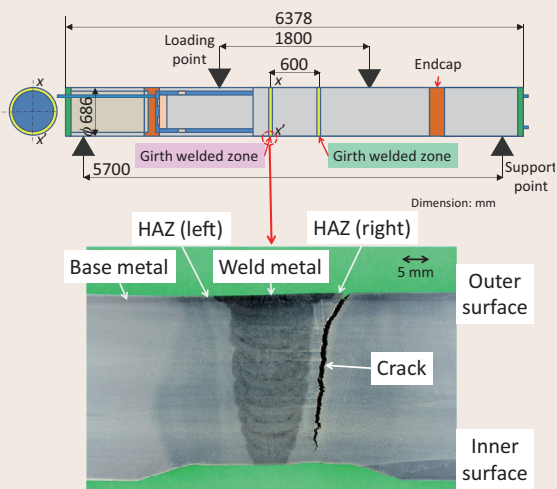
Cross-section of a girth weld in 12Cr steel pipe after creep test
